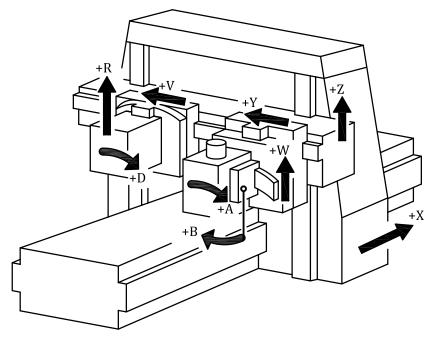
Example of a double column bed-type milling machine with moveable portal (gantry milling machine)
